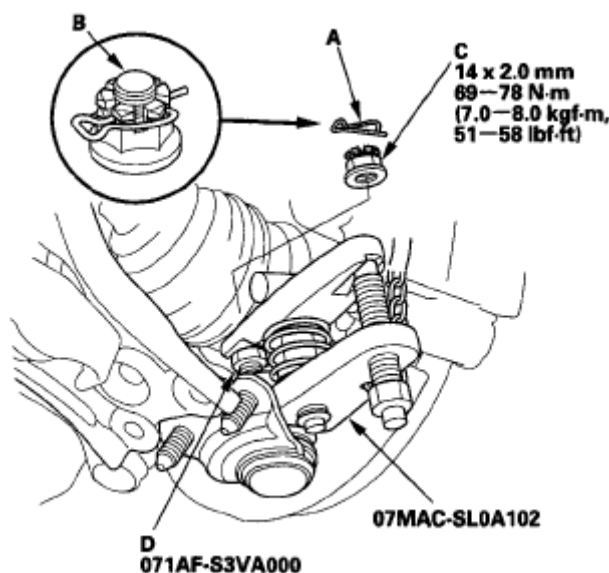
Identifying Lock Pin And Lower Ball Joint Pin (With Torque Specifications)
